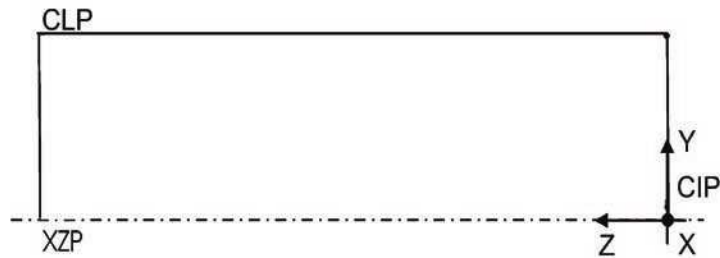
Centre cutting end mill: Sketch of the cutting part
